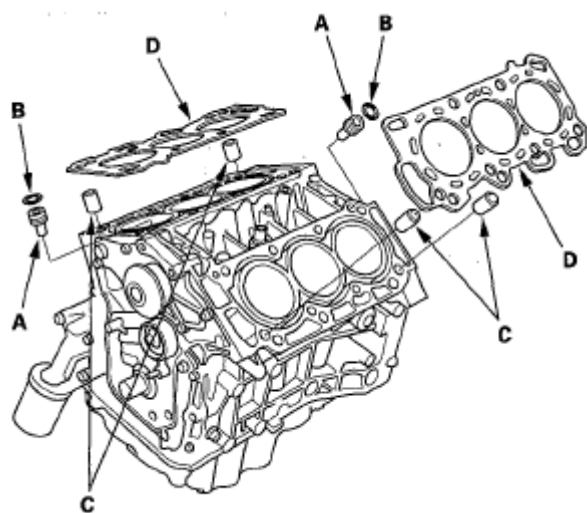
Identifying Oil Control Orifices, O-Rings And Dowel Pins
